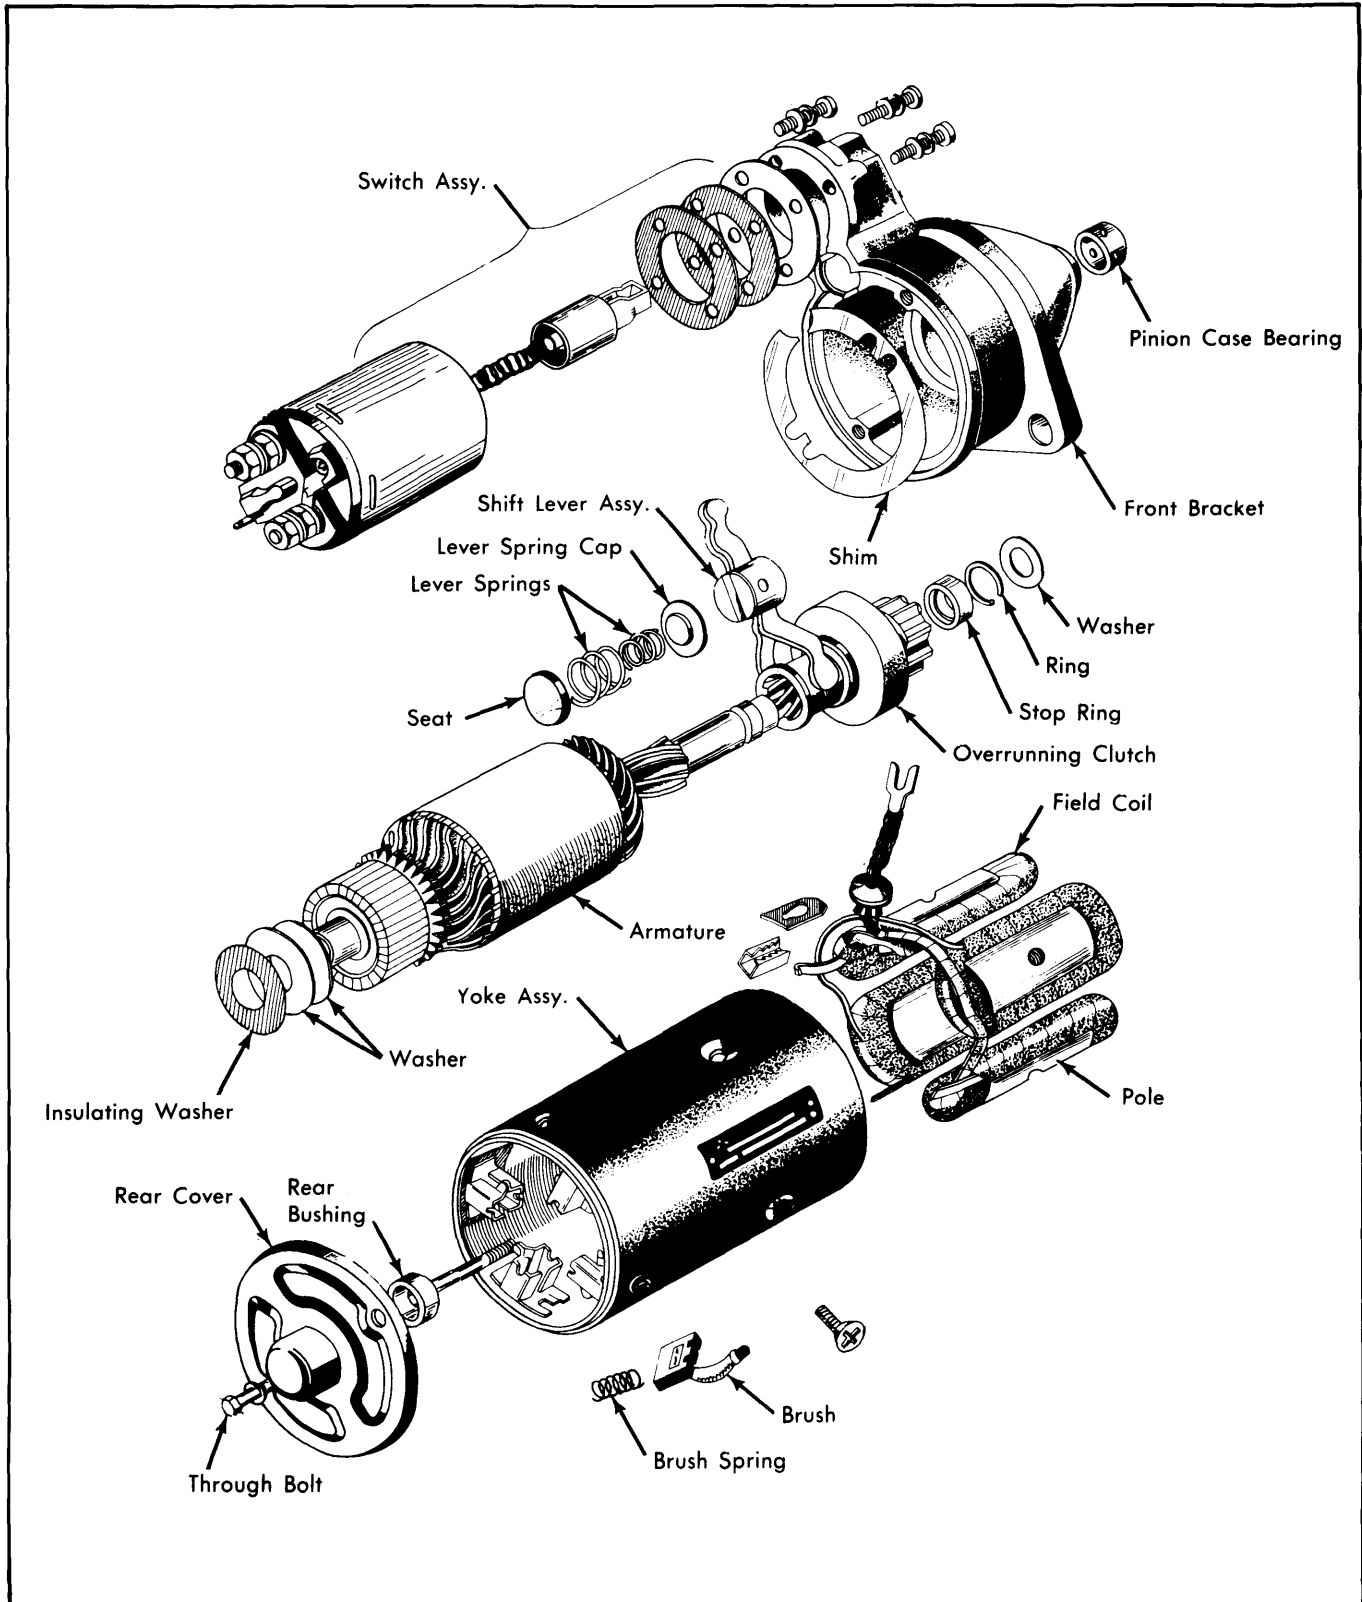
Disassembled View of a Typical Mitsubishi Starter
